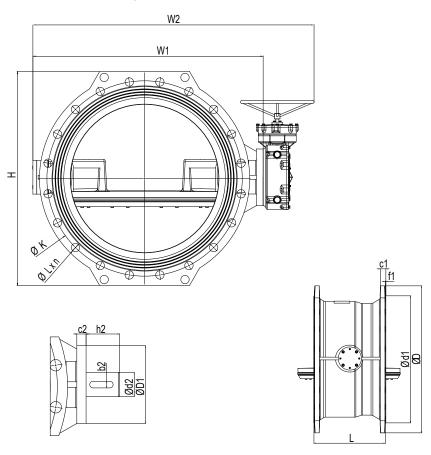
Sectional drawing PN 16 DN 900 - 1800
